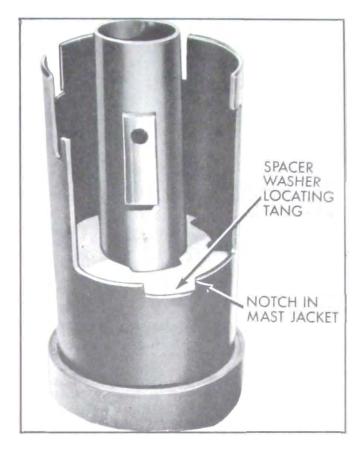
Shift Control Shaft Spacer Washer Installation
